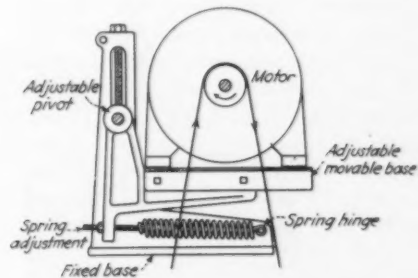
Special Rockwood base adapted for vertical drives, with tension controlled by heavy coiled springs counteracting the motor weight.
